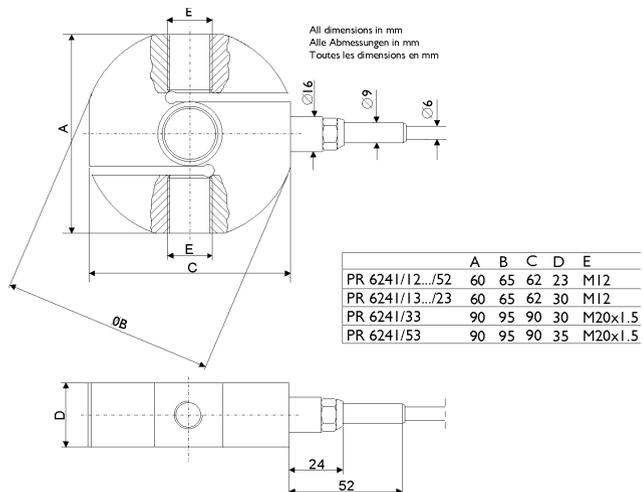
Dimensions of PR 6241/12...53 (version 1)
